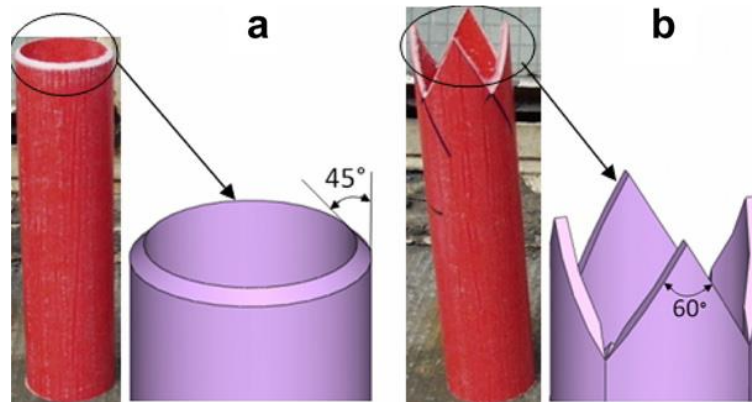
Circular tubes with a) a 45° chamfer trigger and b) a tulip trigger [73]
